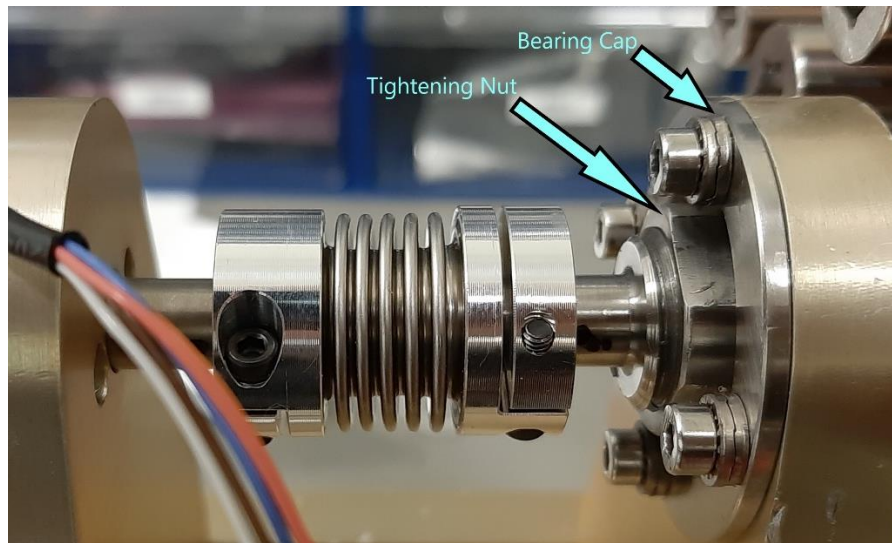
Clamping hubs of the coupler, tightening nut and the bearing cap
